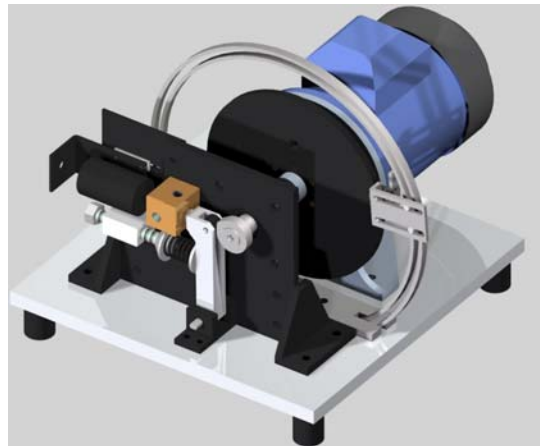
CAD drawing of the valve prototype. The image depicts (among other) electric motor, cam and follower, slide valve housing (yellow cube) and solenoid (From [22]).
